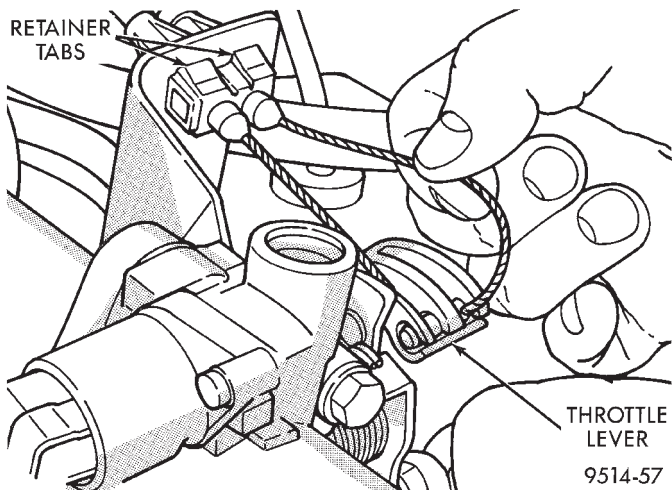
Throttle Cable Attachment to Throttle Body Attachment—2.4L Engine
